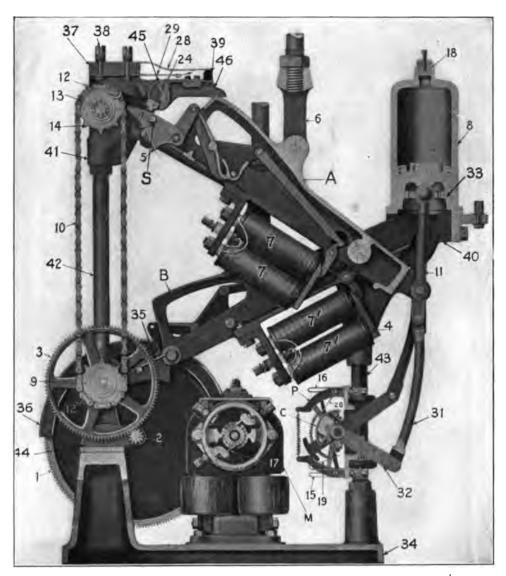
Sectional View, Style "B," Motor Mechanism. Union Switch & Signal Company.
